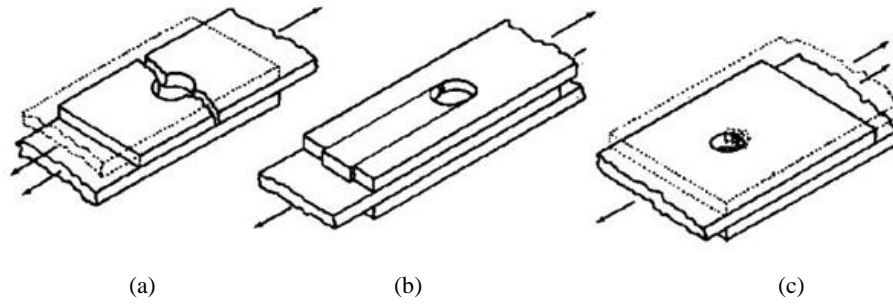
Common failure modes in composite plates (Aktas and Dirikolu,2004)
